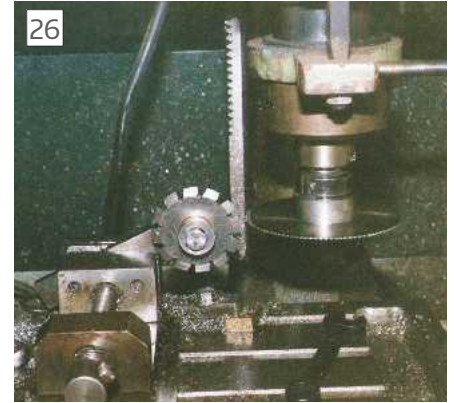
illustrates the blank cutting procedure. In the photographs the three stages beyond the basic turning and parting off from the round bar are illustrated. The cutter, while in the lathe,
